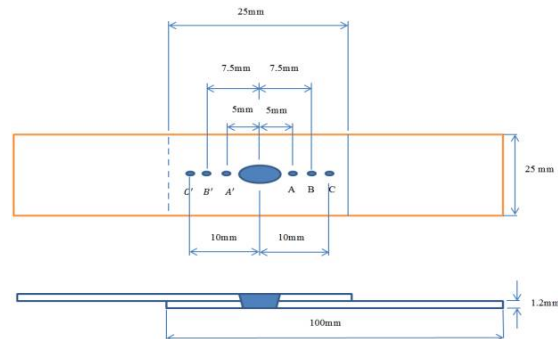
The dimensions of welded joint and the location of residual stress measuring points
